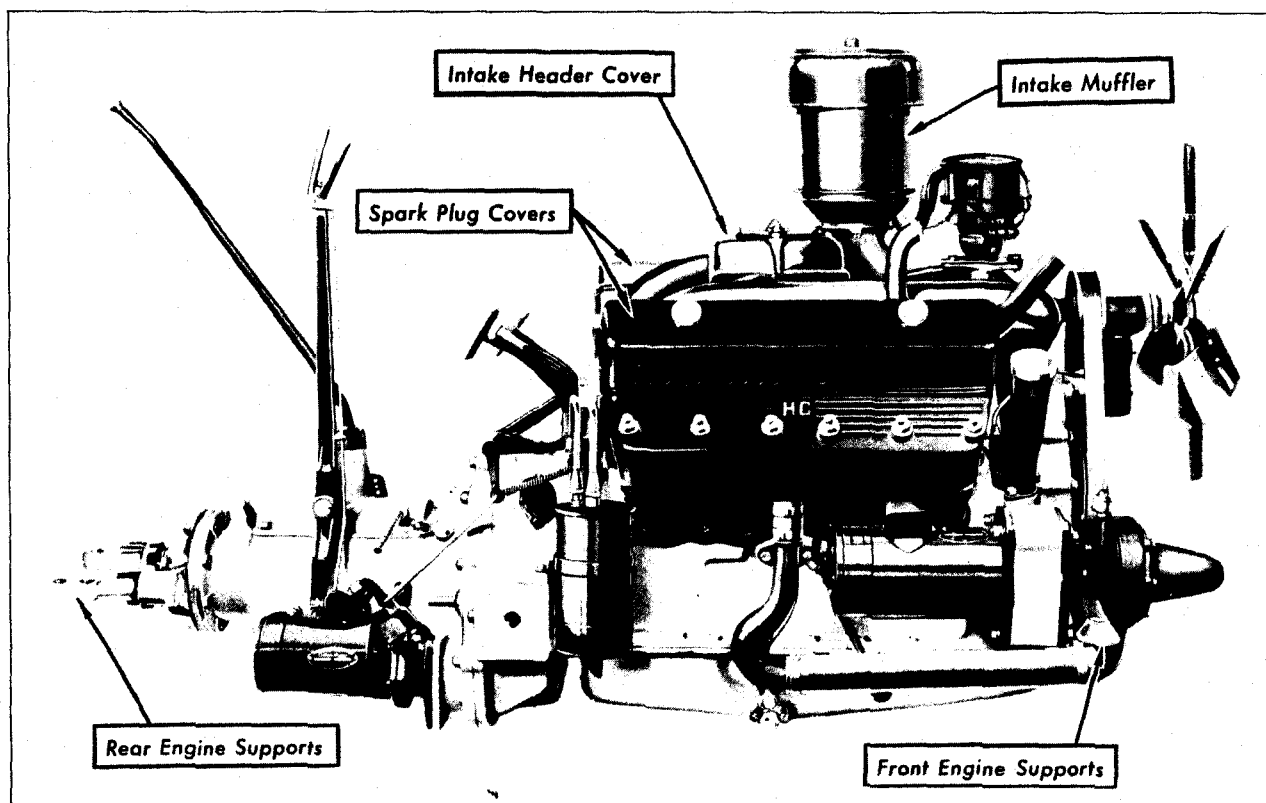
The Cadillac 355 engine. The La Salle 345 is the same except in appearance and method of mounting.
